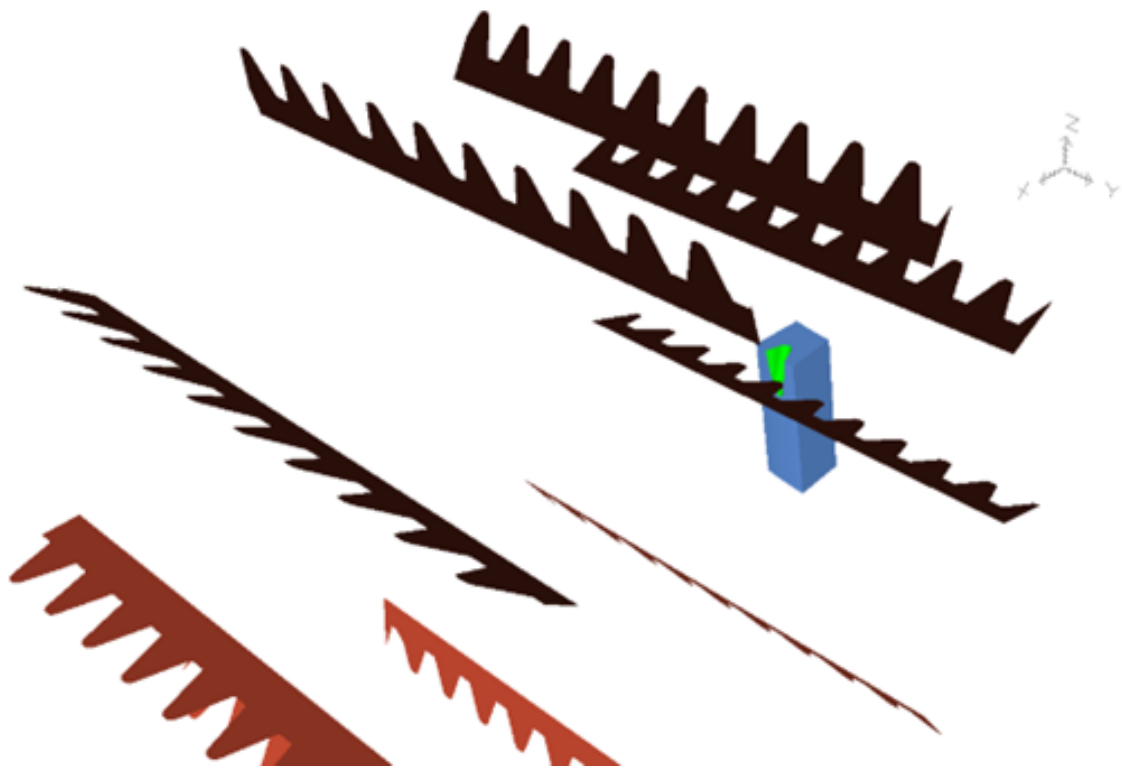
Hobbing simulation for a single tooth gap workpiece
